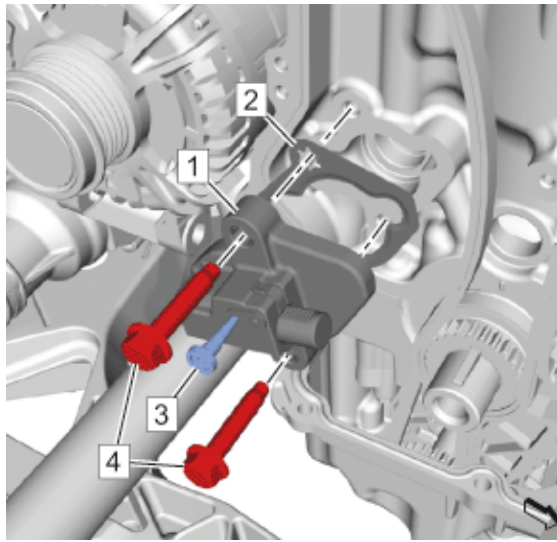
Timing Chain Tensioner Tool, Timing Chain Tensioner, Bolts And Gasket
